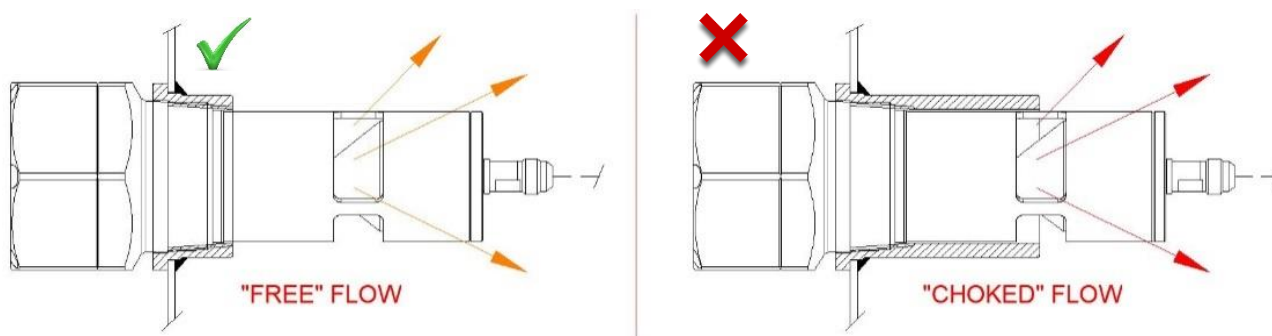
Do NOT Install Valve Back End within Pipe or Extended Socket
